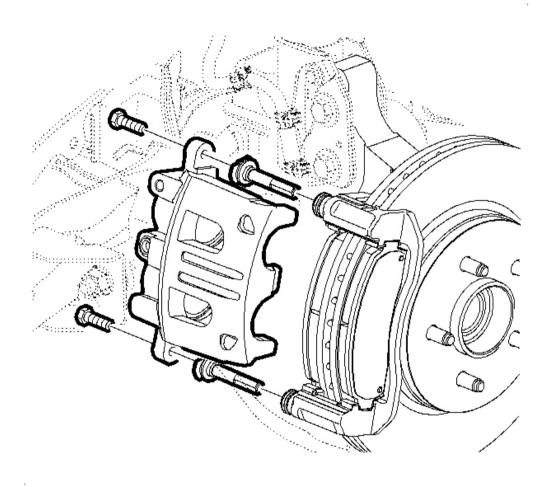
Removing/Installing Brake Caliper Guide Pins Courtesy of GENERAL MOTORS CORP.
